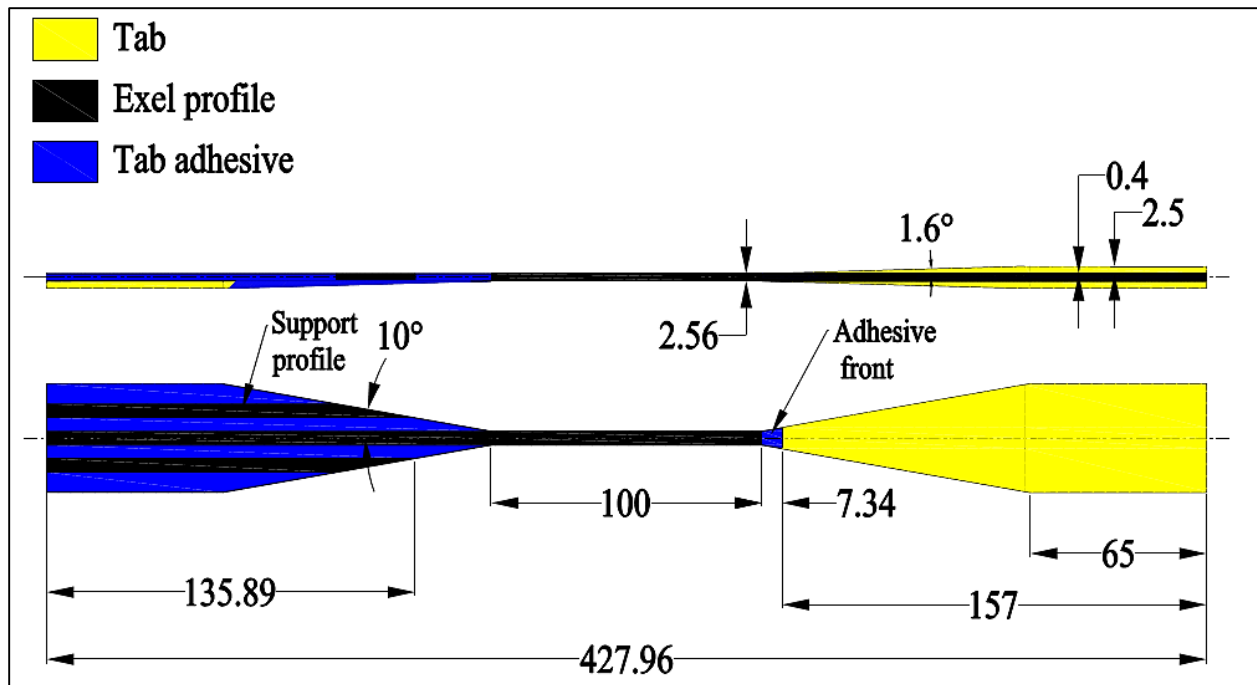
D2 specimen configuration (All dimensions in mm)
